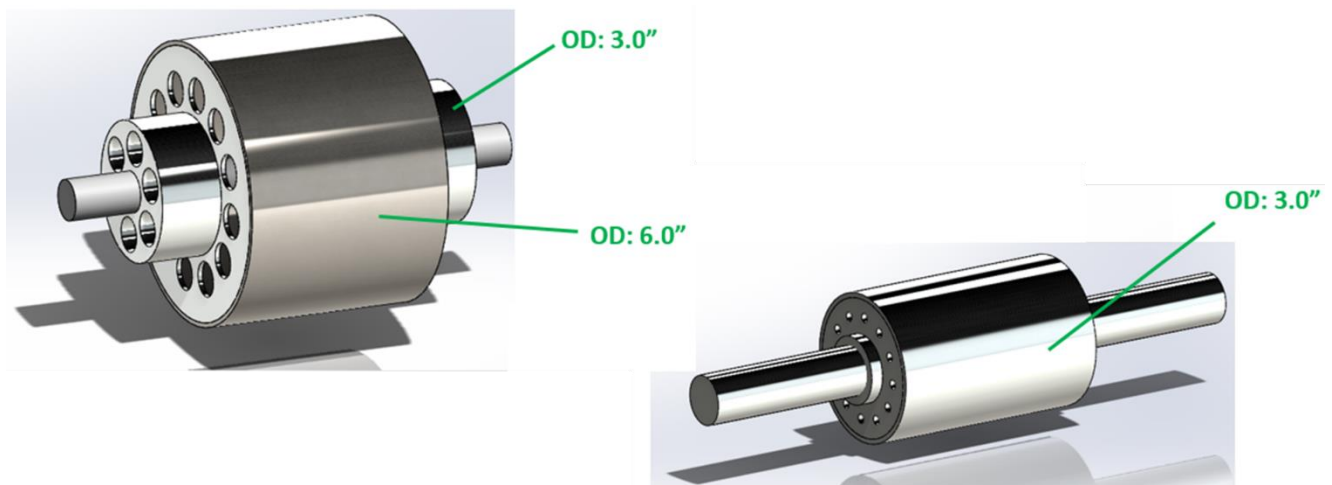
SolidWorks drawings of the printhead roller assemblies, showing outer diameters.
